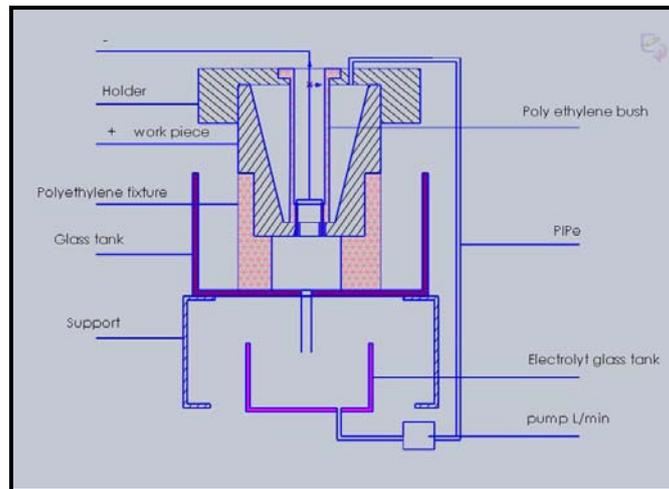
Schematic of electro polishing system to polish wire drawing guides and tools.
